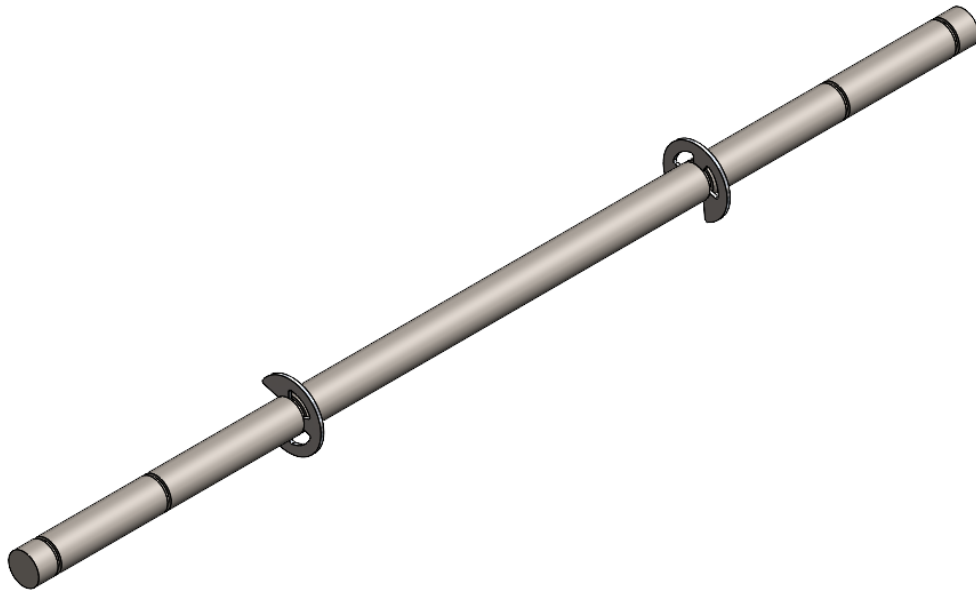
The 1/4" retaining rings assembled to the ramp shaft.
